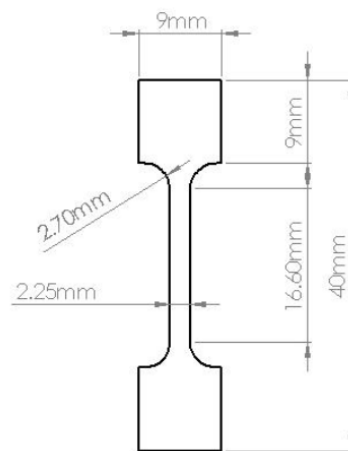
The sample dimensions for load-biased heating-cooling and fatigue tests.
